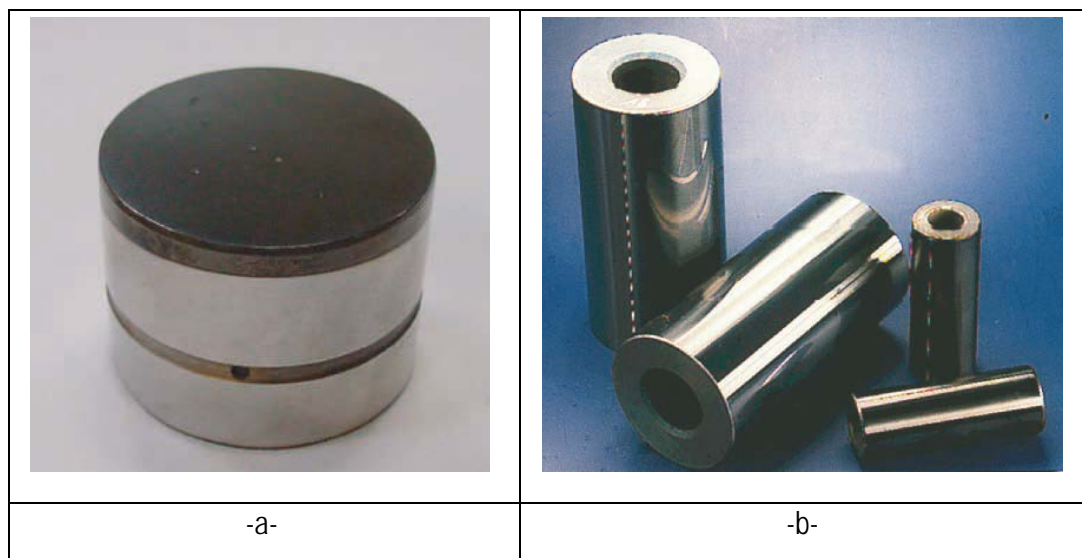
DLC coating on a tappet (a) and on piston pins (b) [17]
